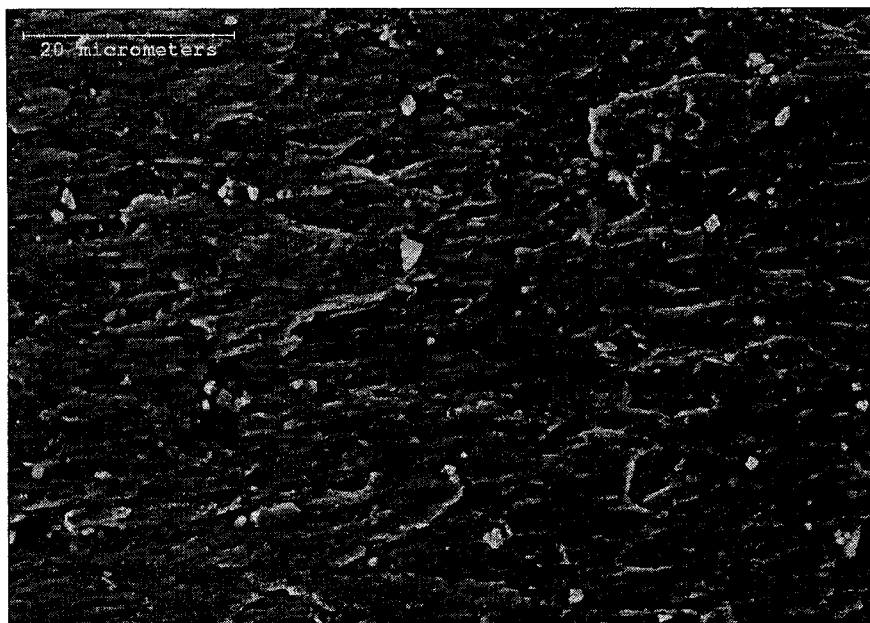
Fracture Surface of Test Specimen T12-1
